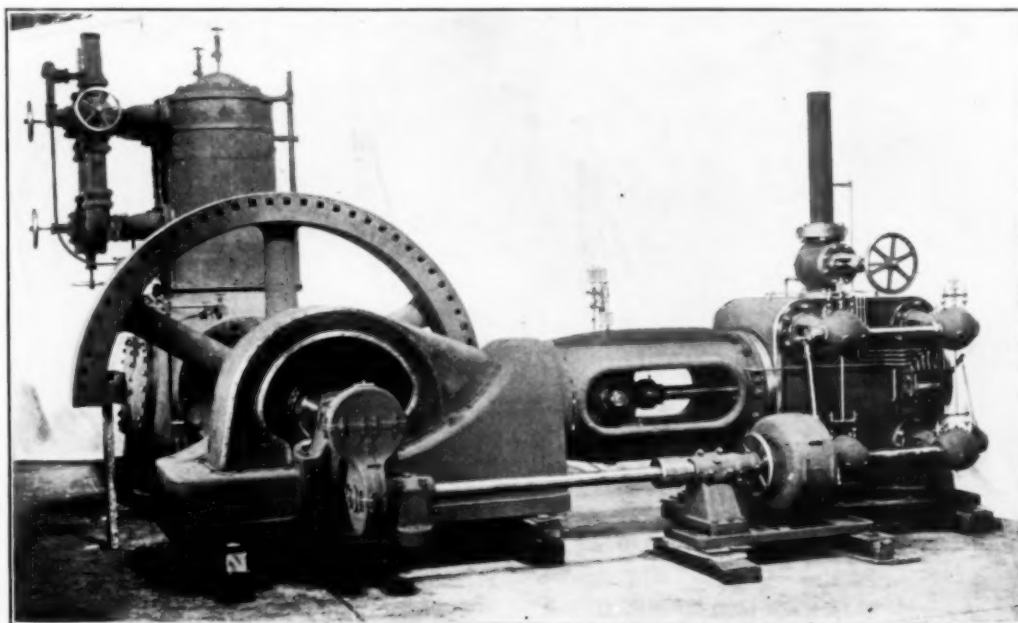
POPPET-VALVE STEAM ENGINE BUILT BY YORK MANUFACTURING CO.
